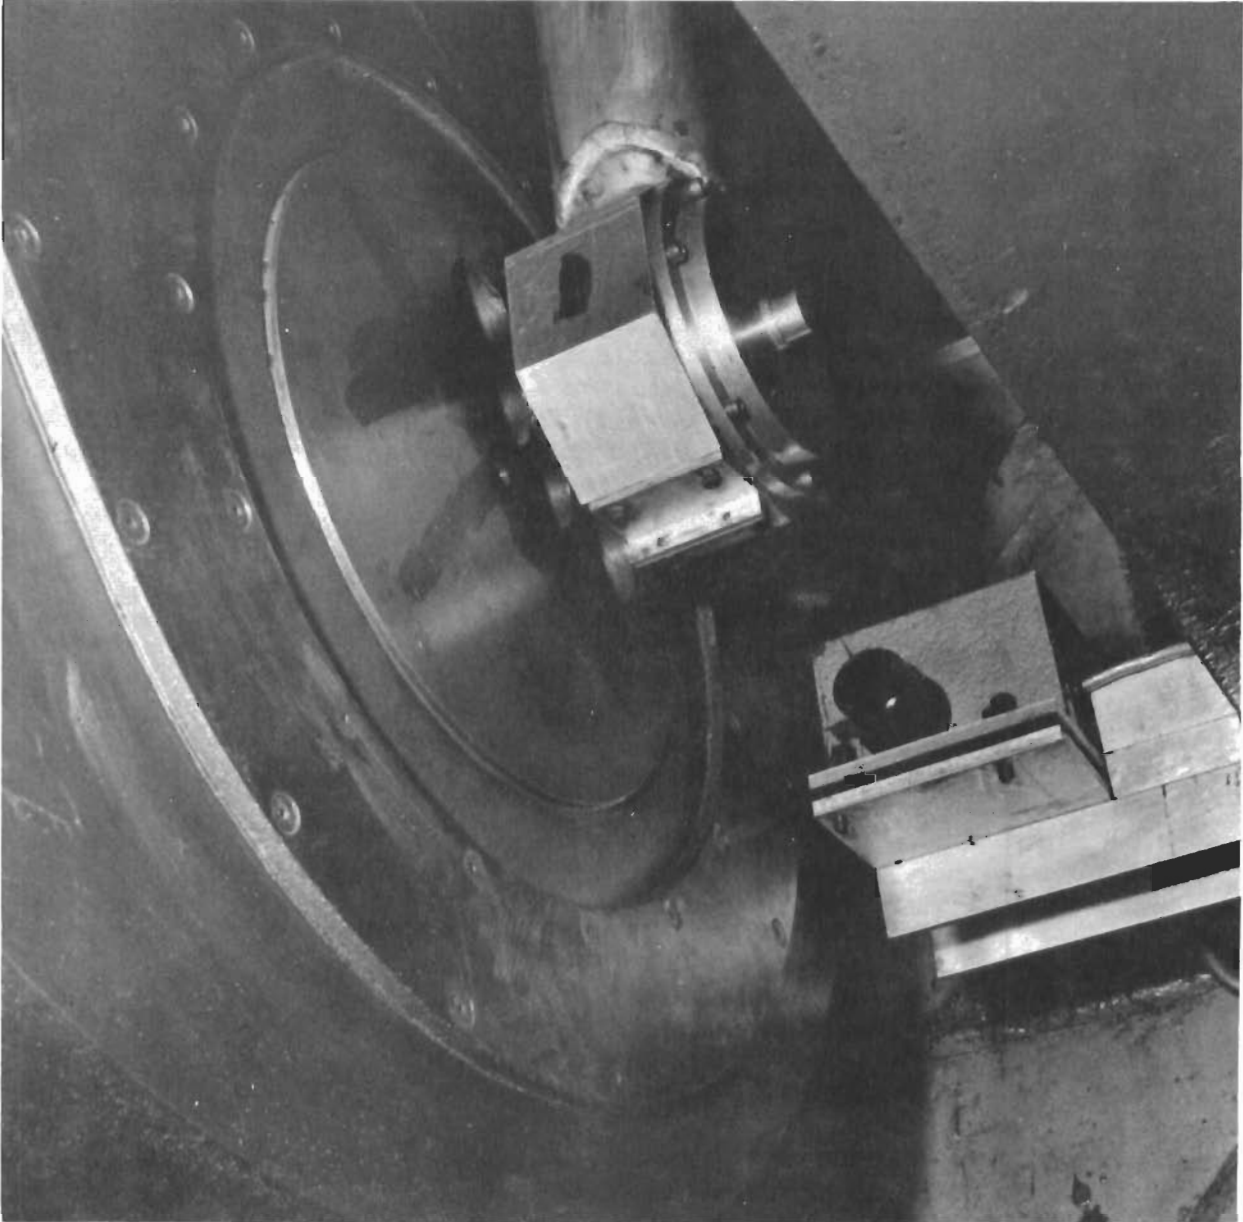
THE ECCENTRIC CRANK AND CONNECTING ROD ASSEMBLY
